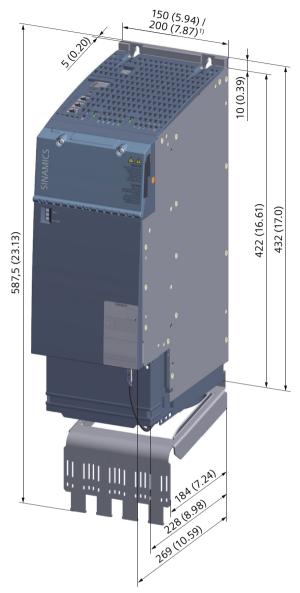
Dimension drawing Motor Modules 45 A and 60 A, all data in mm and (inch)
